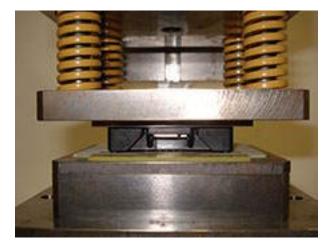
Step 3: Start the semiautomatic machine to press the pressfit module into the PCB, making sure there is no gap between the stand-off and the PCB.
